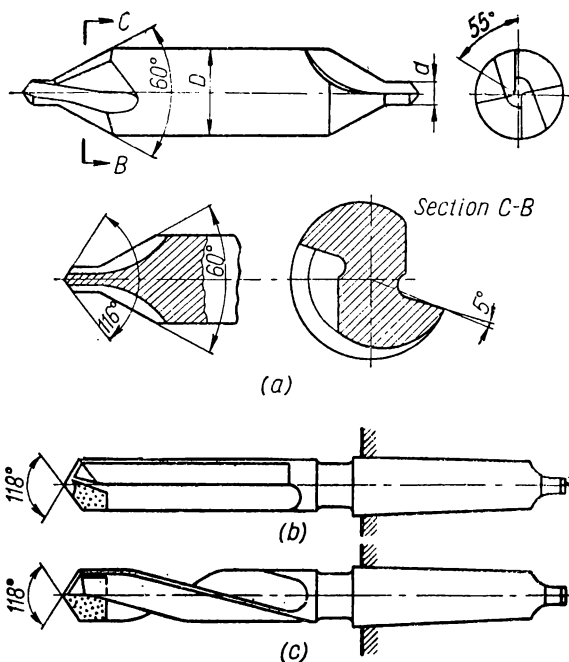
(a) combined drill and countersink, (b) straight-flute carbide-tipped drill, (c) helical-flute carbide-tipped drill
